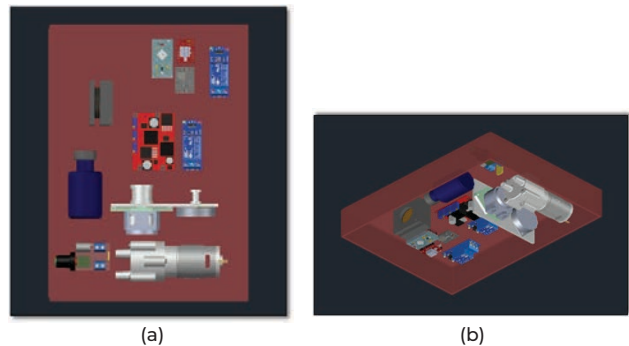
Ink Marker Layout (a) Front view (b) Isometric view
